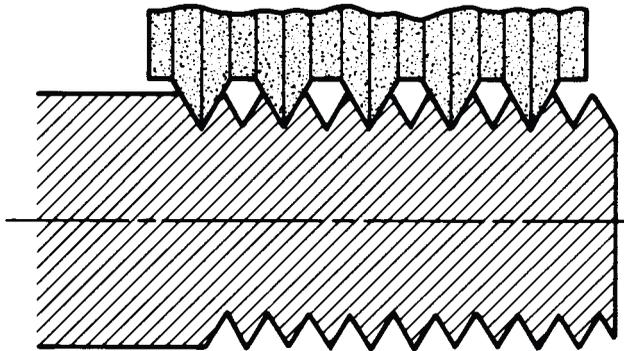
Alternate-ribbed Wheel for Grinding the Finer Pitches
